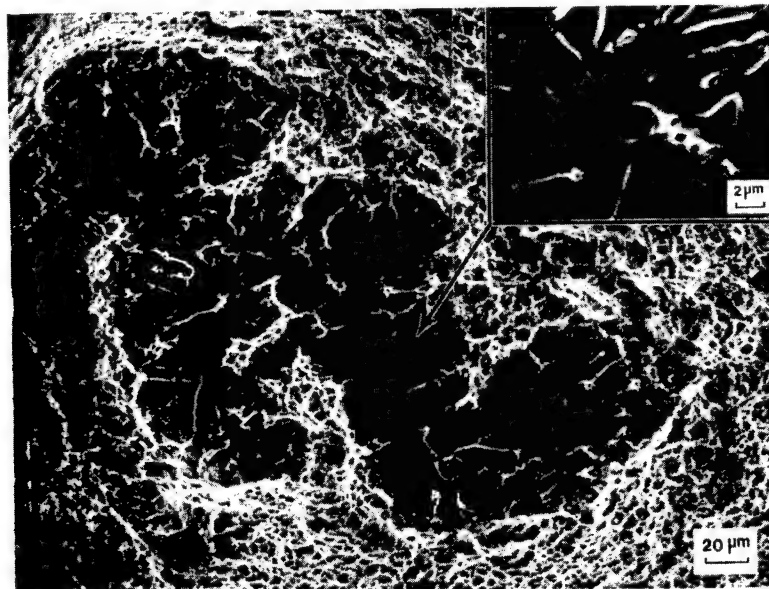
An isolated cleavage region (ICR) initiated at a fractured inclusion particle and surrounded by hole-joining fracture within a nuclear pressure vessel steel weld metal.
